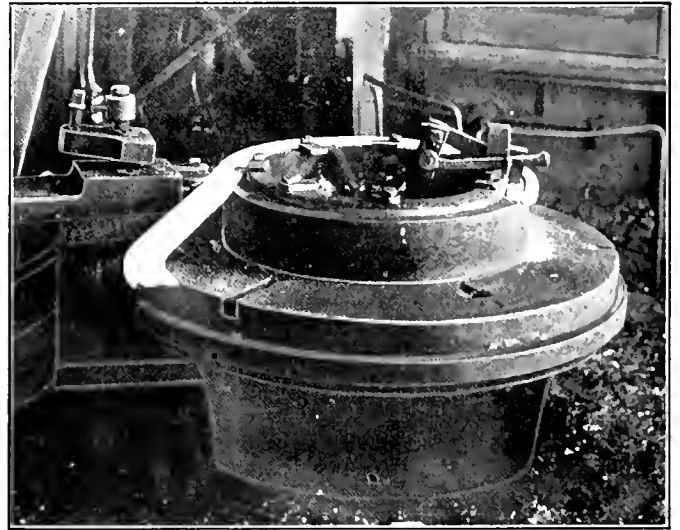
Old Boring Mill Used for Bending Retaining Rings; Canadian Pacific.
